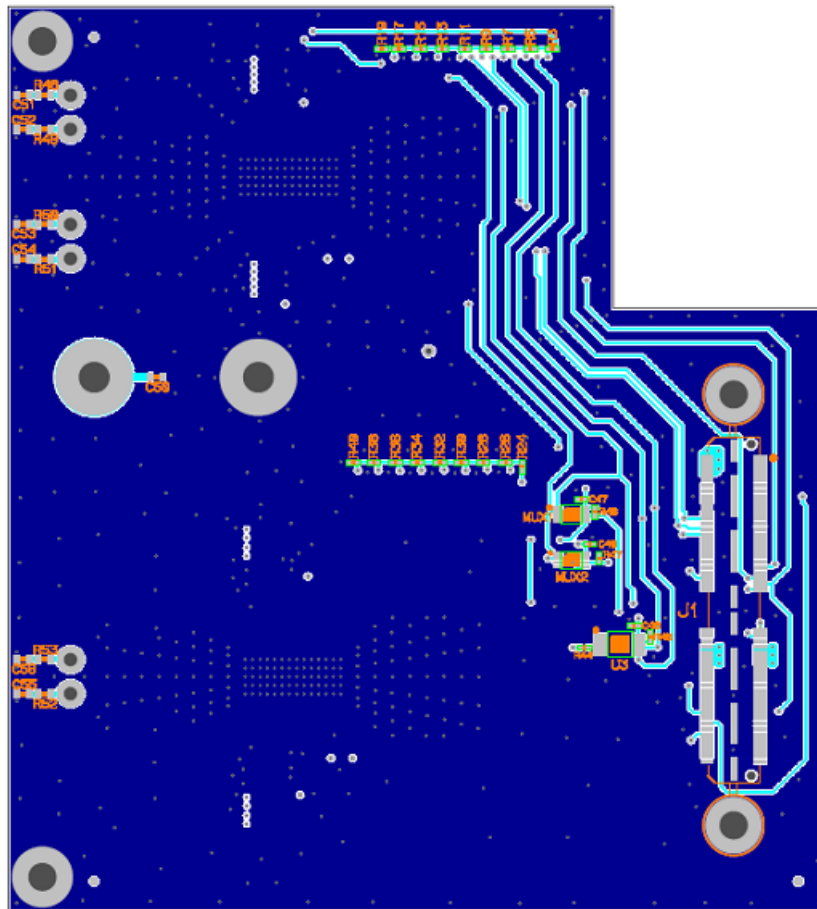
TAS5754/6MDCAEVM Bottom Composite Assembly
